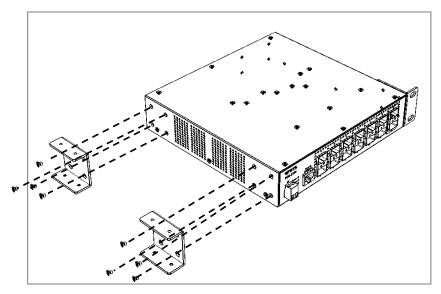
Install the ∐-shaped fixed pieces in the reverse direction for two-switch mounting
